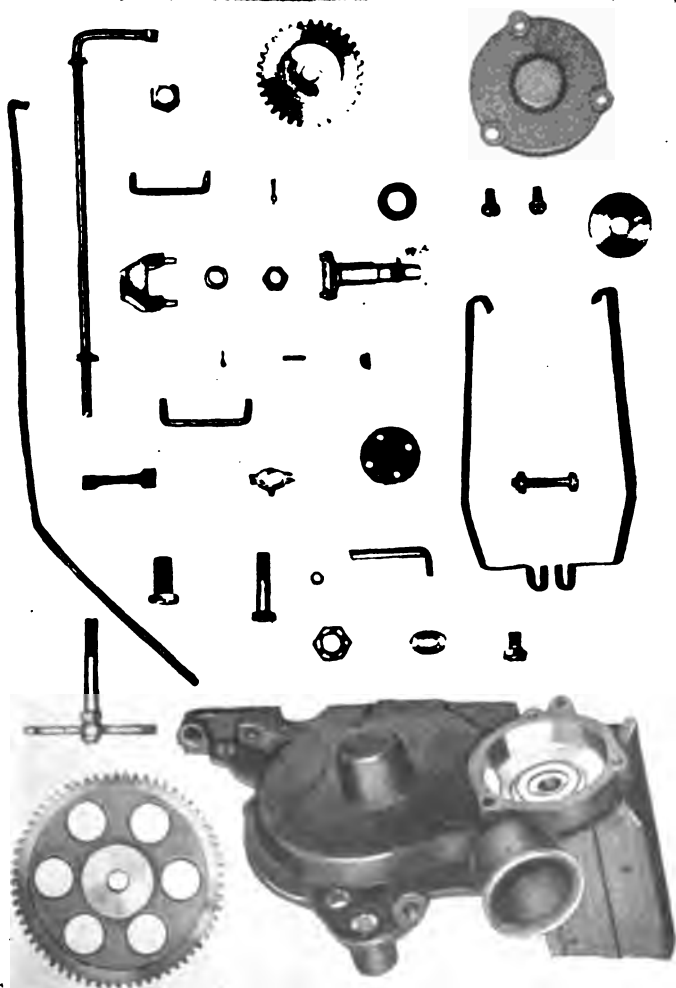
The various parts required in mounting the Dixie magneto on a Ford car
